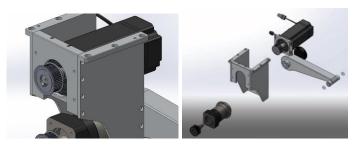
Structural position of servo and gear box and assembly of motor to belt
